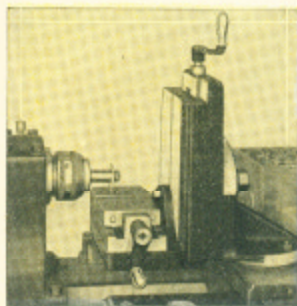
Milling Attachment Fitted with Horizontal Vise Fixture.
